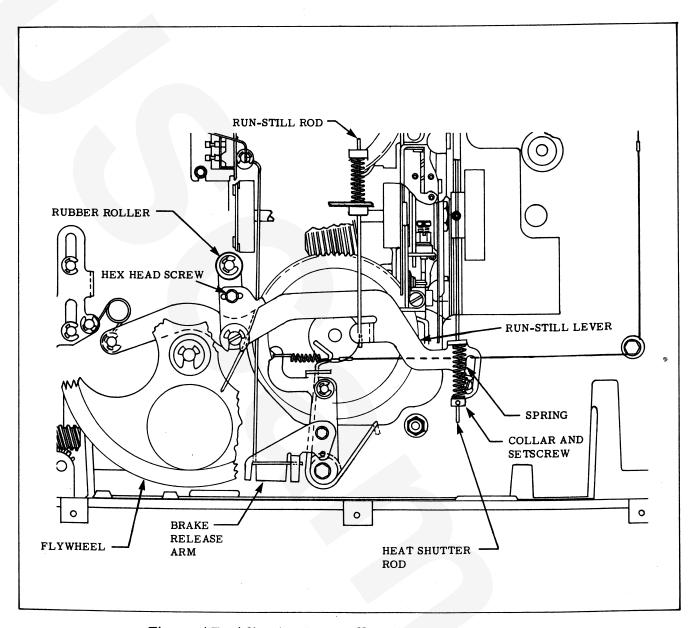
Figure AF. Adjusting Run-Still Brake and Heat Shutter
